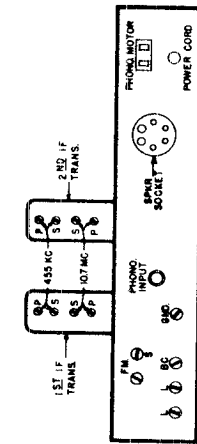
REAR VIEW OF MAIN CHASSIS
